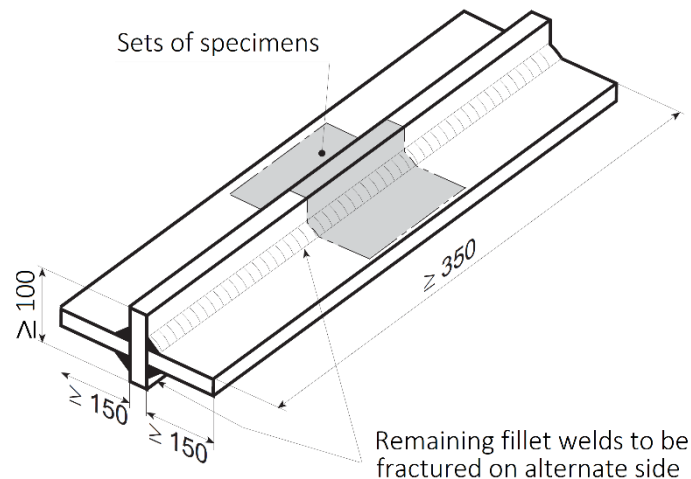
Double T-joint (cruciform) test pieces for manual and semi-automatic welding procedures (welding position PG)
